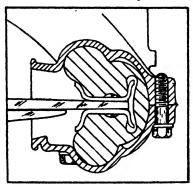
Rubber Block Method OF ANCHORING SPRING END
